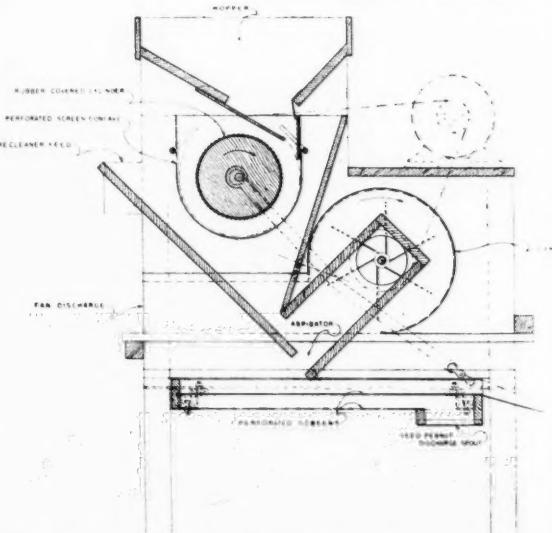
A sectional view of the USDA seed peanut sheller showing relationship of parts. The section is through one aspirator
